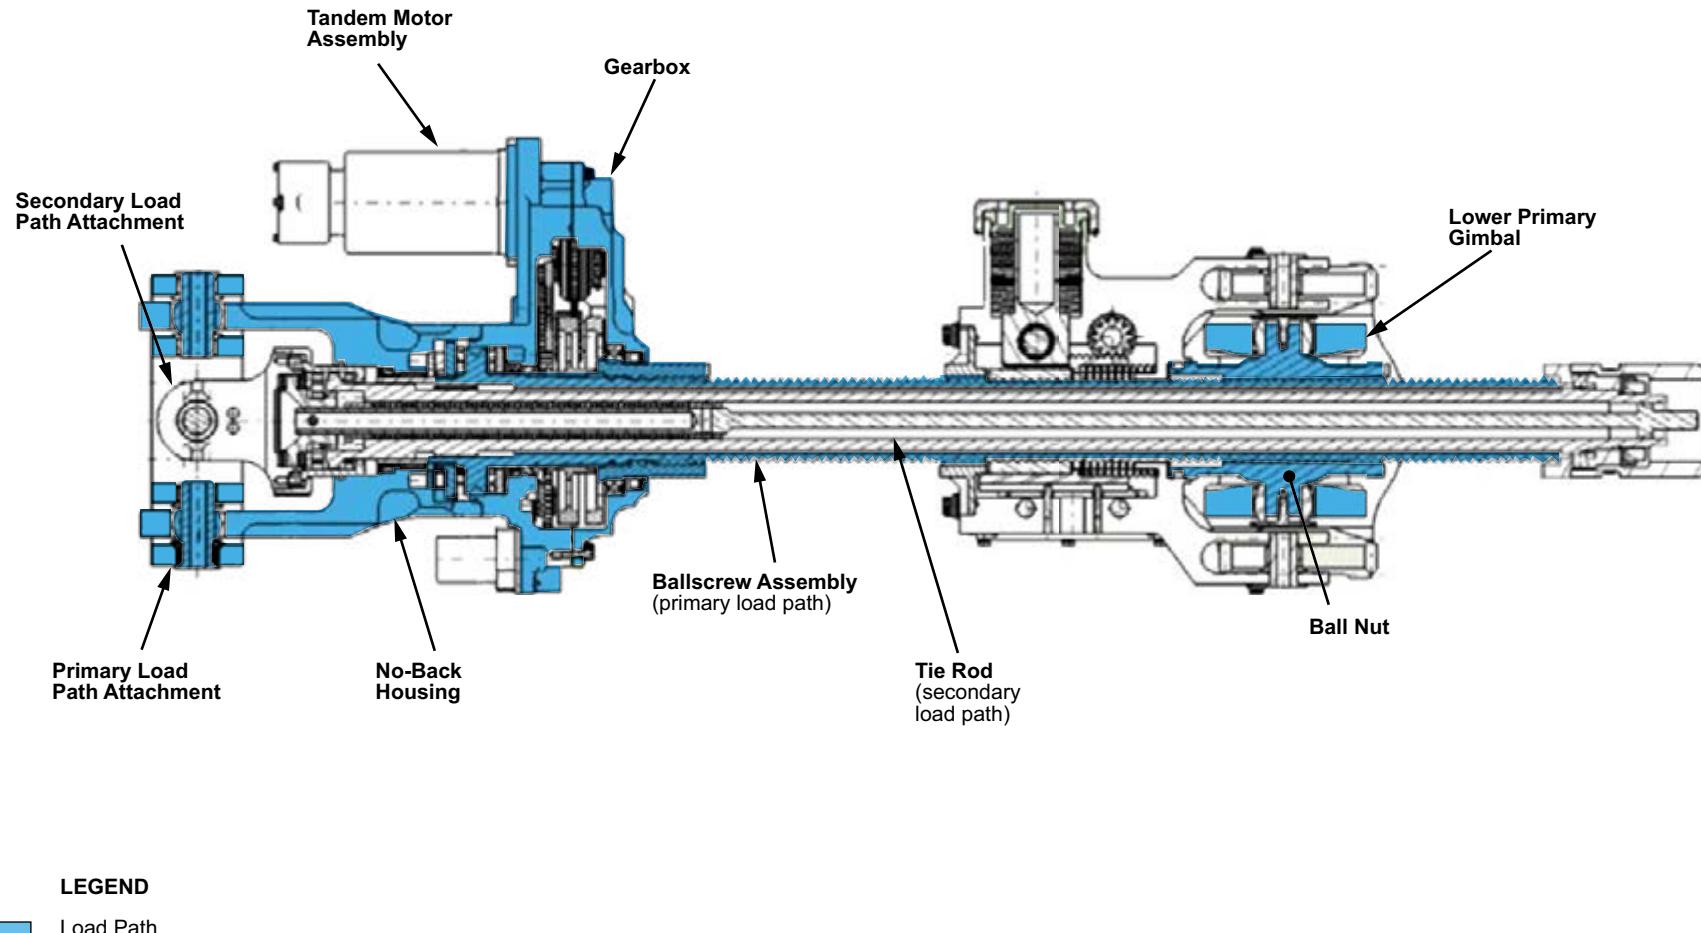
HSTA Ballscrew and No-Back Device Assembly
